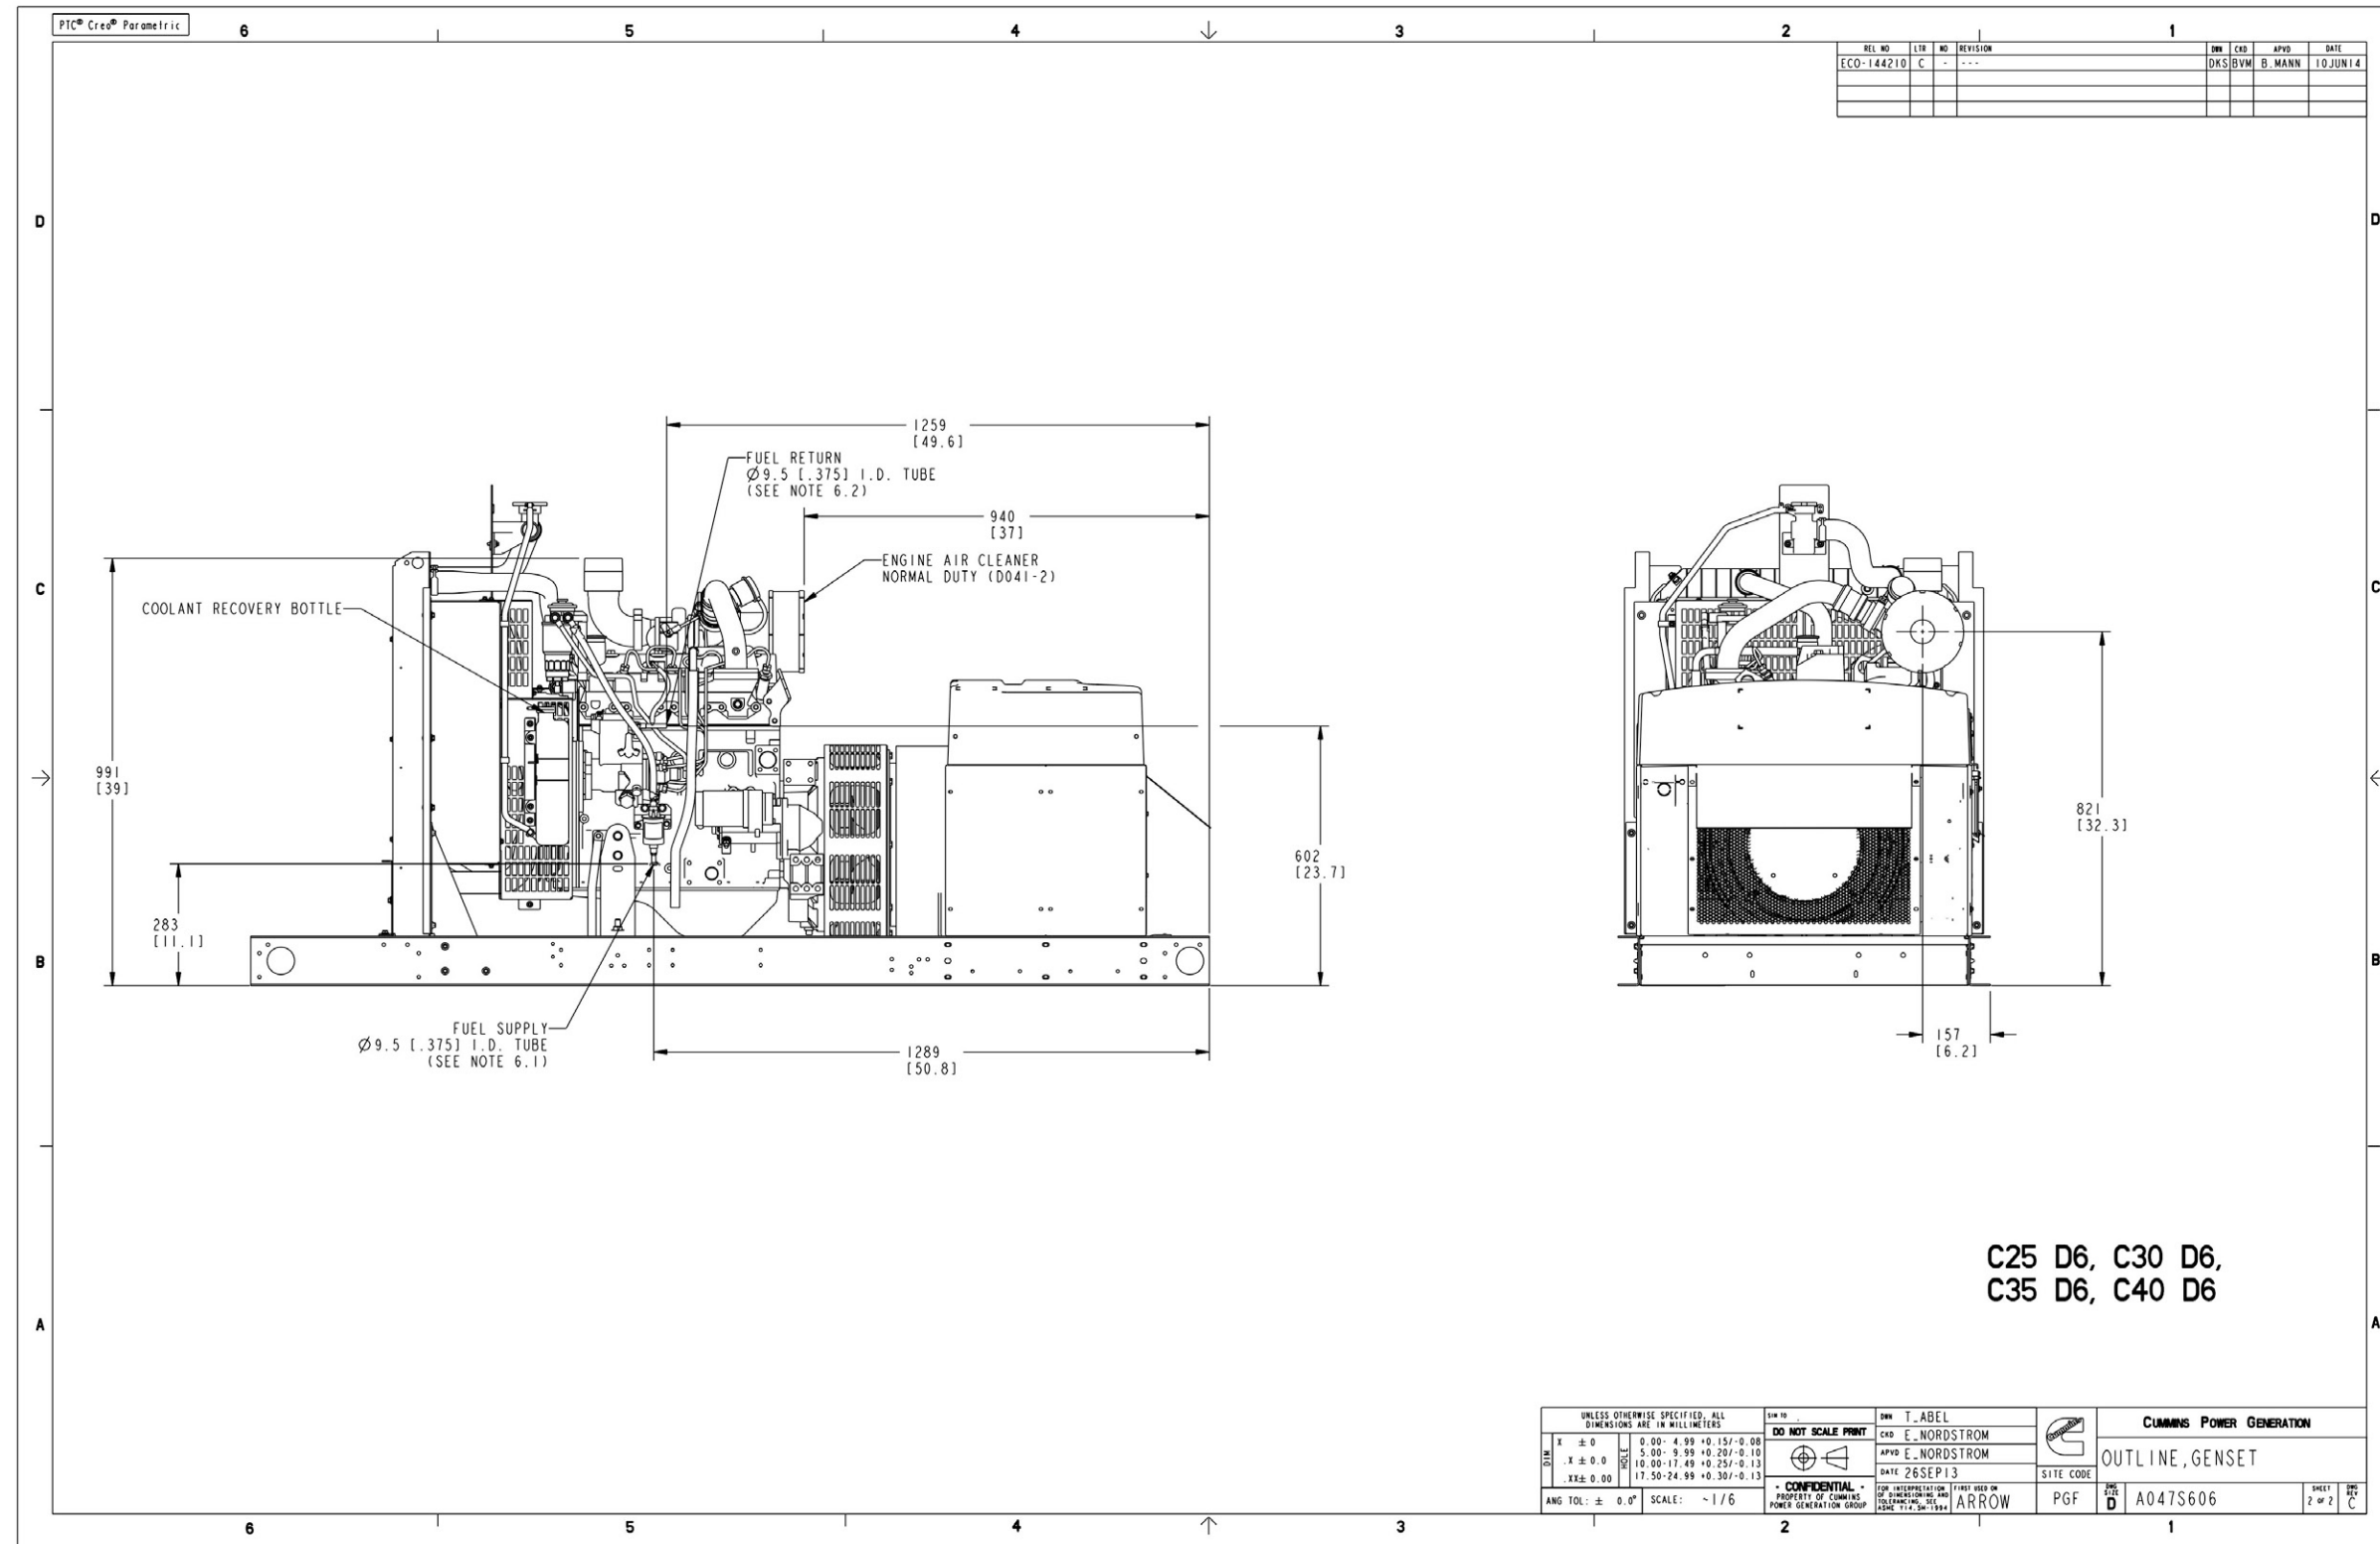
GENERATOR SET OUTLINE, OPEN (25 KW, 30 KW, 35 KW, 40 KW) (SHEET 2 OF 2)
